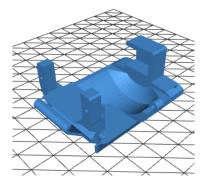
Smaller Potentiometer Slide Holder [28]
